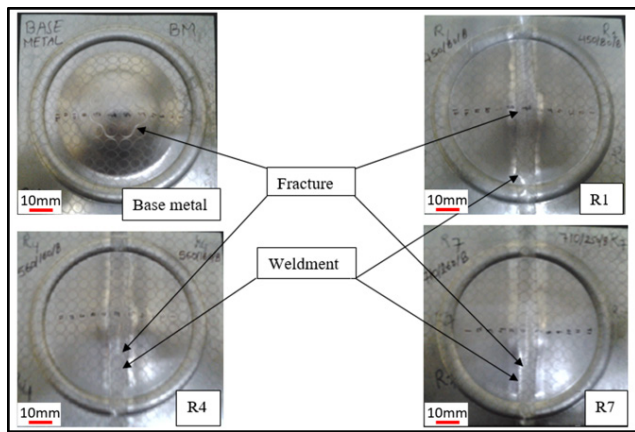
Deformed FSW welded samples under various parameter sets (with grid marking) for biaxial stretching
